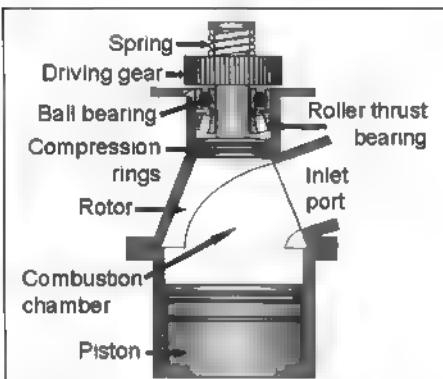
An Aspin rotary valve with the inlet port open and the piston descending.
